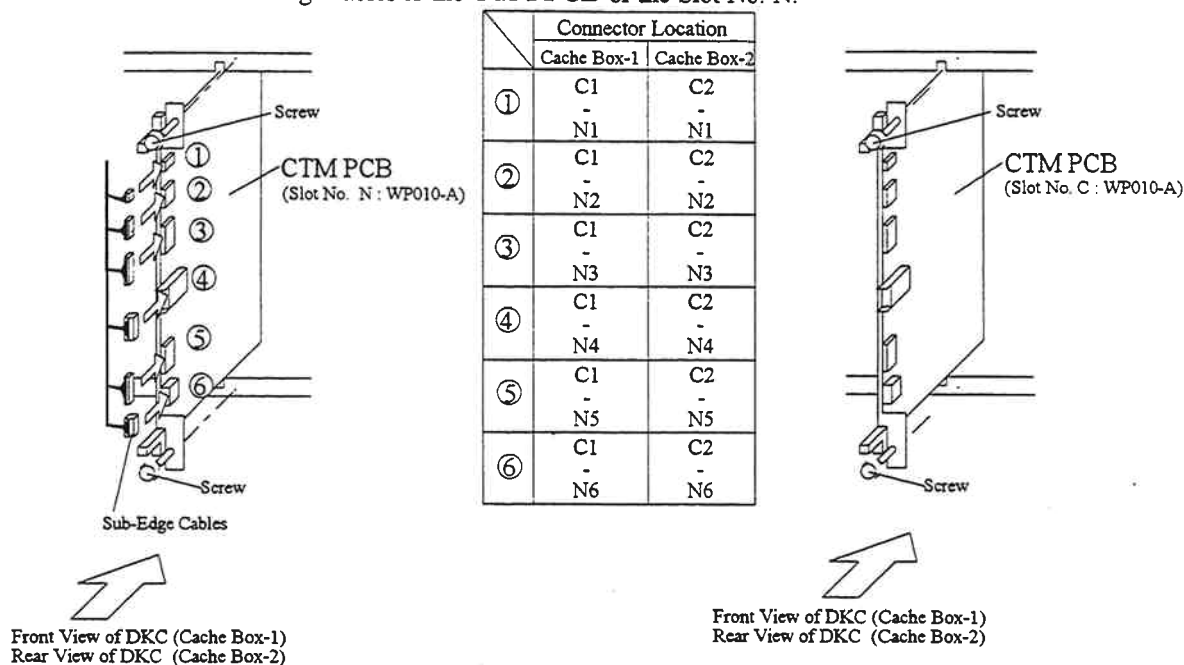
Insertion of the Cache PCB
